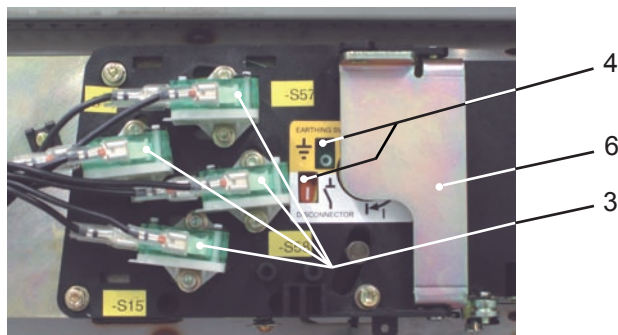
(Detail A in fig. 6.2.4 – without cover) Auxiliary switches for switch position detection (3) and mechanical access interlock (closed) for emergency manual operation (6)
